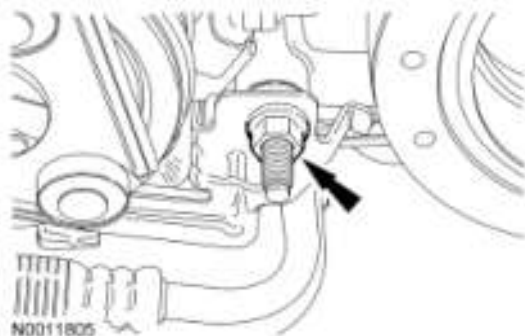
Identifying Cooler Tube/Electrical Harness Support Bracket Bolt
